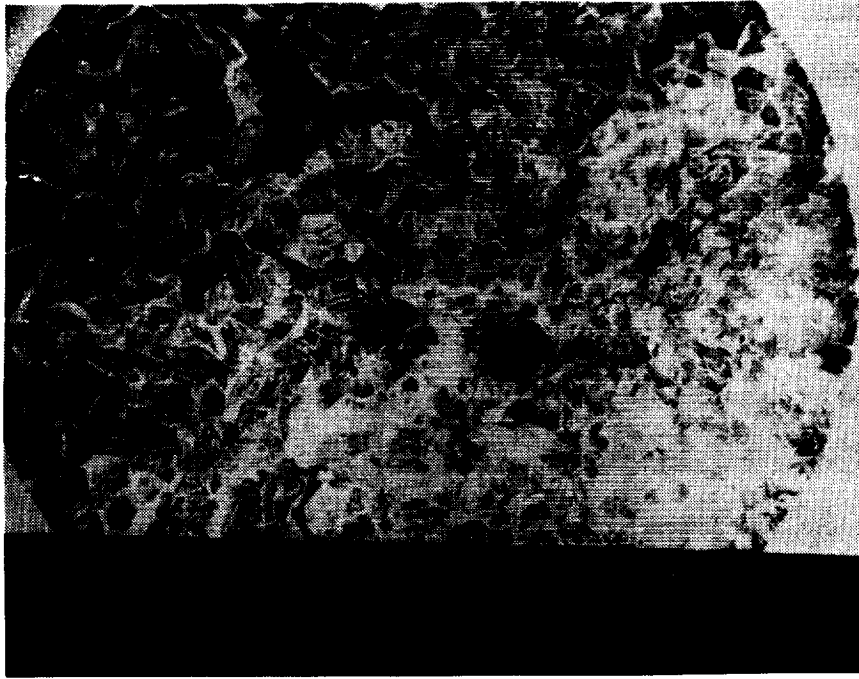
Fracture surface of as-extruded Ni-36Al alloy showing a casting pipe at the center which was not healed by the extrusion process.
